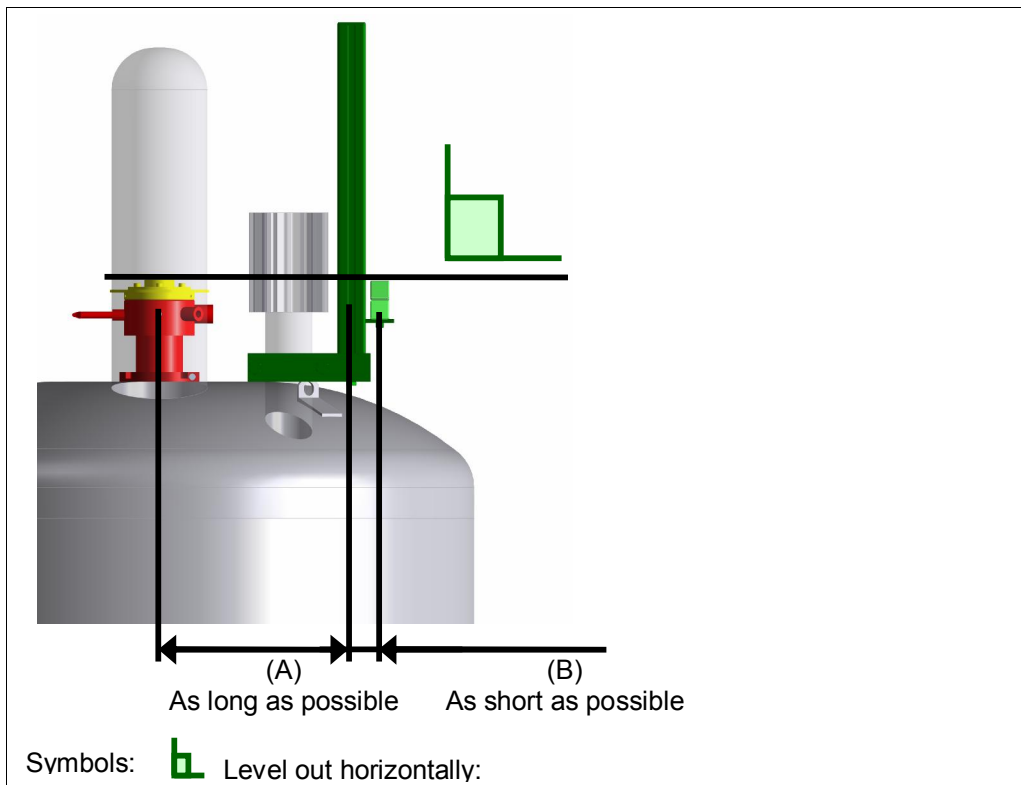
Adjust the height of THE LINEAR AXIS MOUNTING UNIT N₂ NOZZLE SIDE
